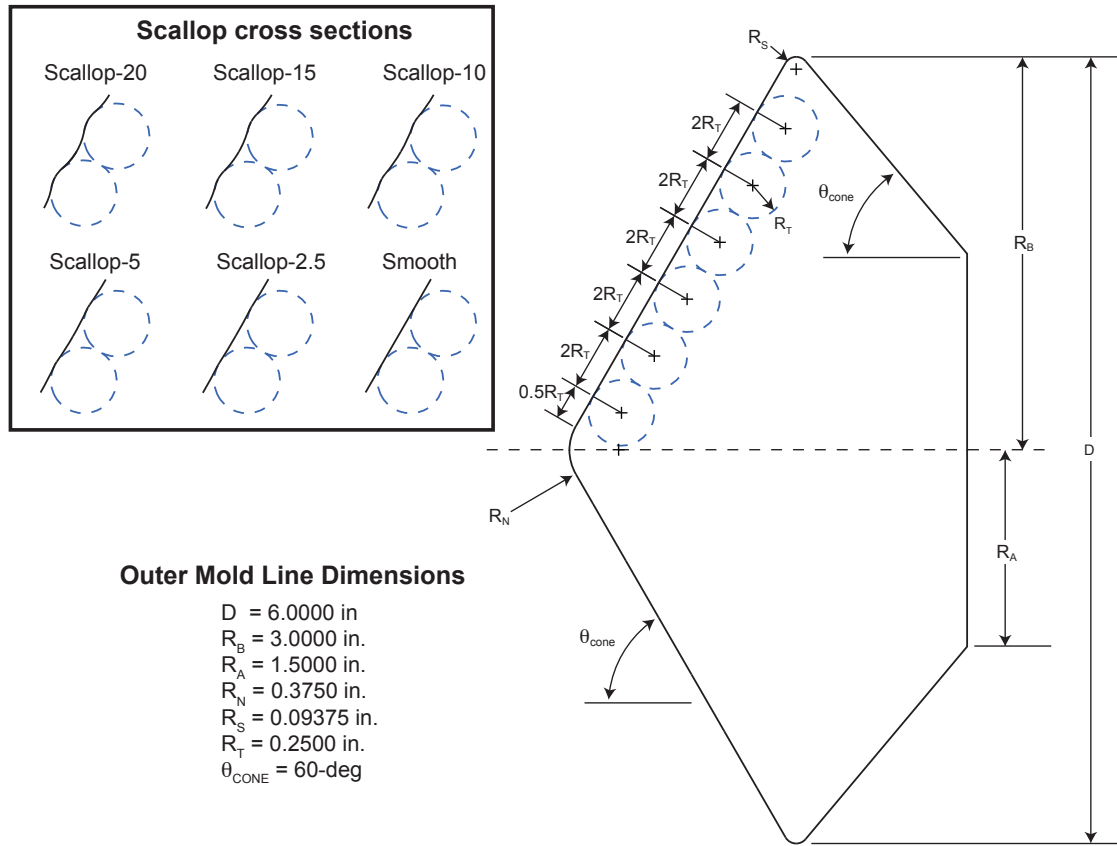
Parametric Scallop Model Outer Mold Line Dimensions.
